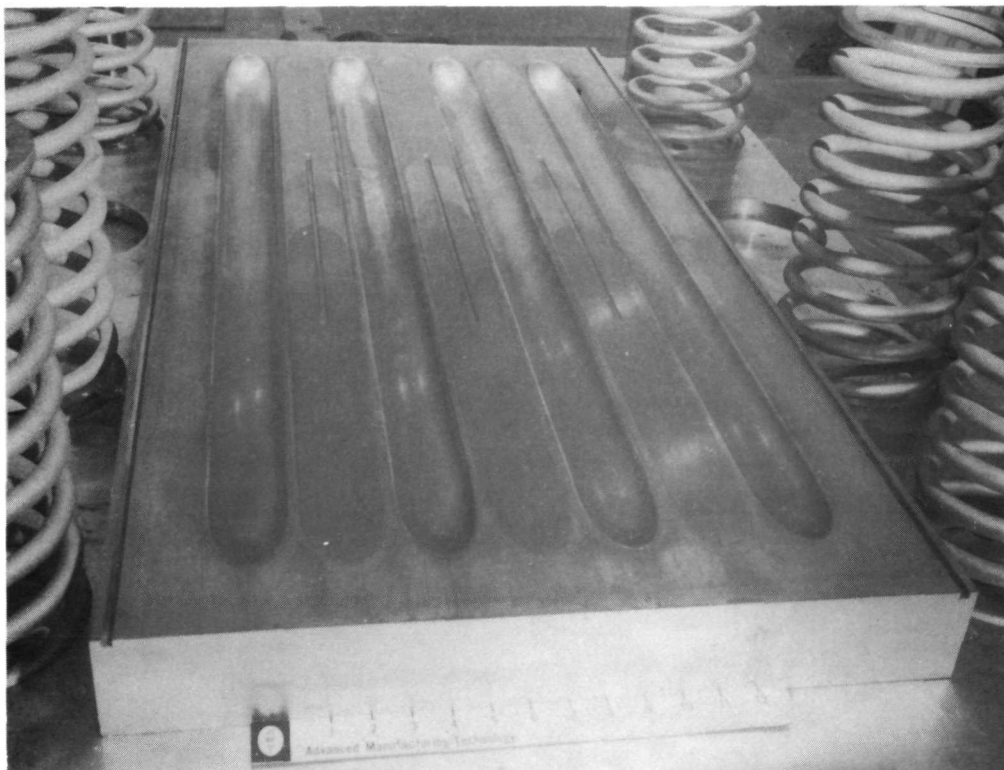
Lower Half of Aluminum Beaded Panel Forming Die Showing Stripper Springs
